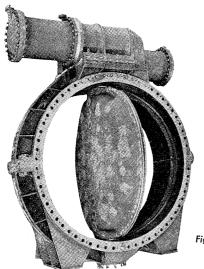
Butterfly valve (inlet dia. 3200 mm, head 100 m)
